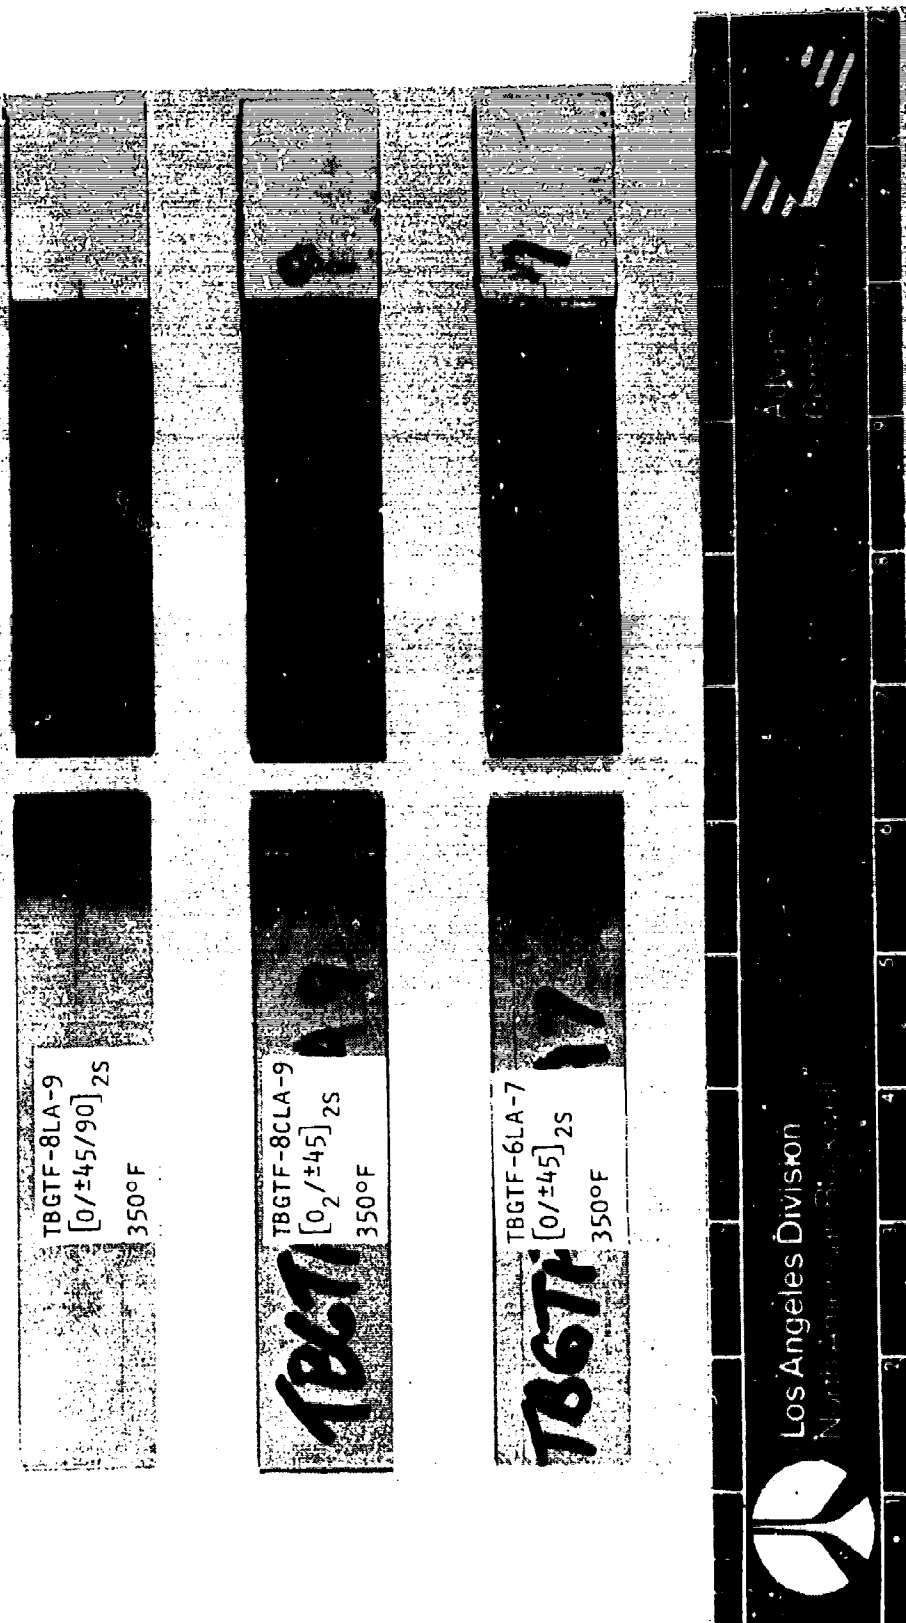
Graphite/Epoxy to Titanium Bonded Symmetrical Scarf Joint Tension Fatigue Specimens - 350°F (Type AS/3002 - Batch) Metlbond 329-7 Adhesive
